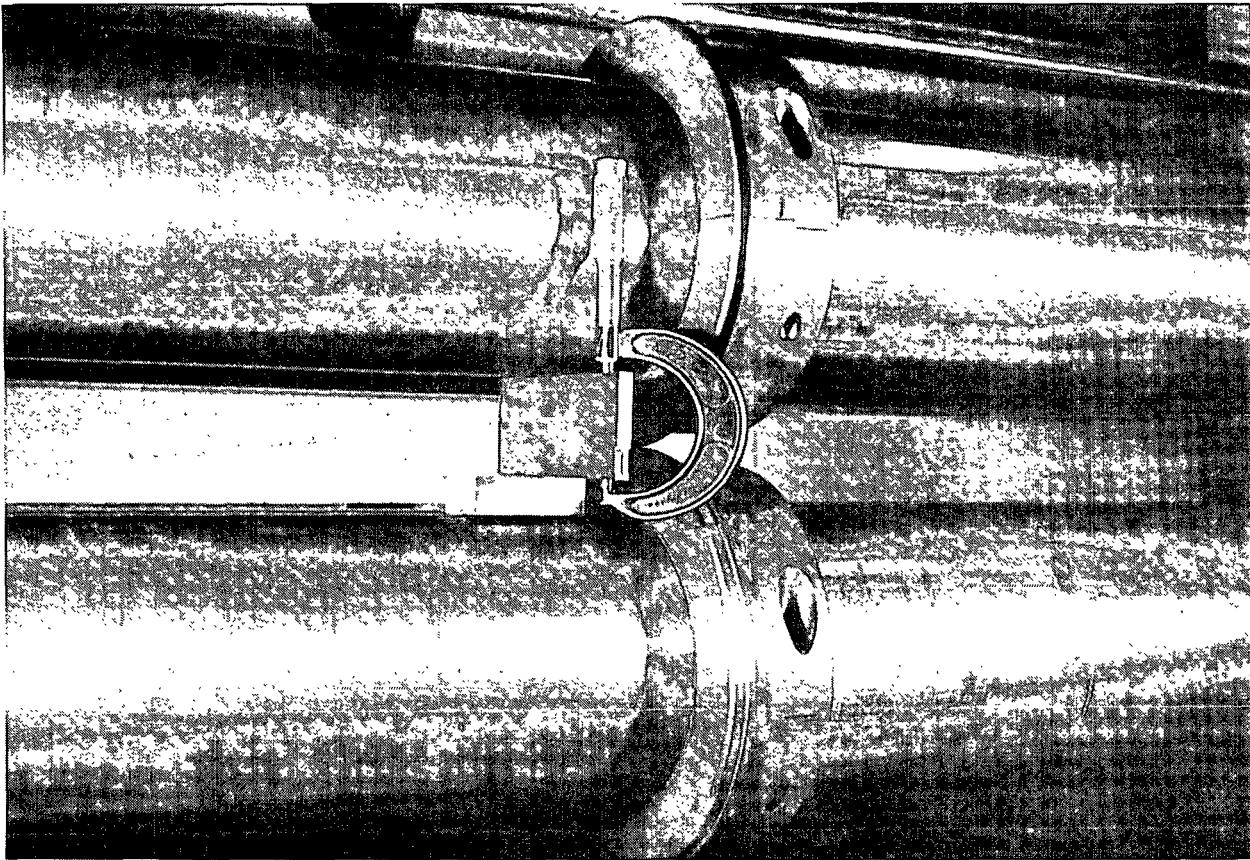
Indirect Method for Measuring Scoring Wheel Clearance
